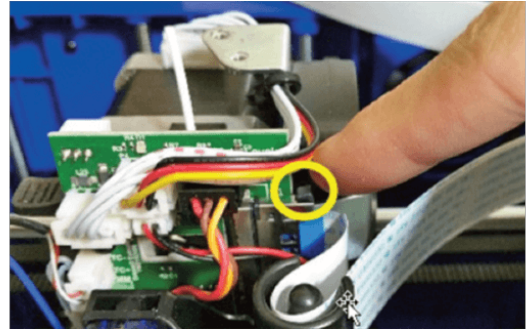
7b: Disconnect shielded circuit ribbon cable from extruder PCBA.
